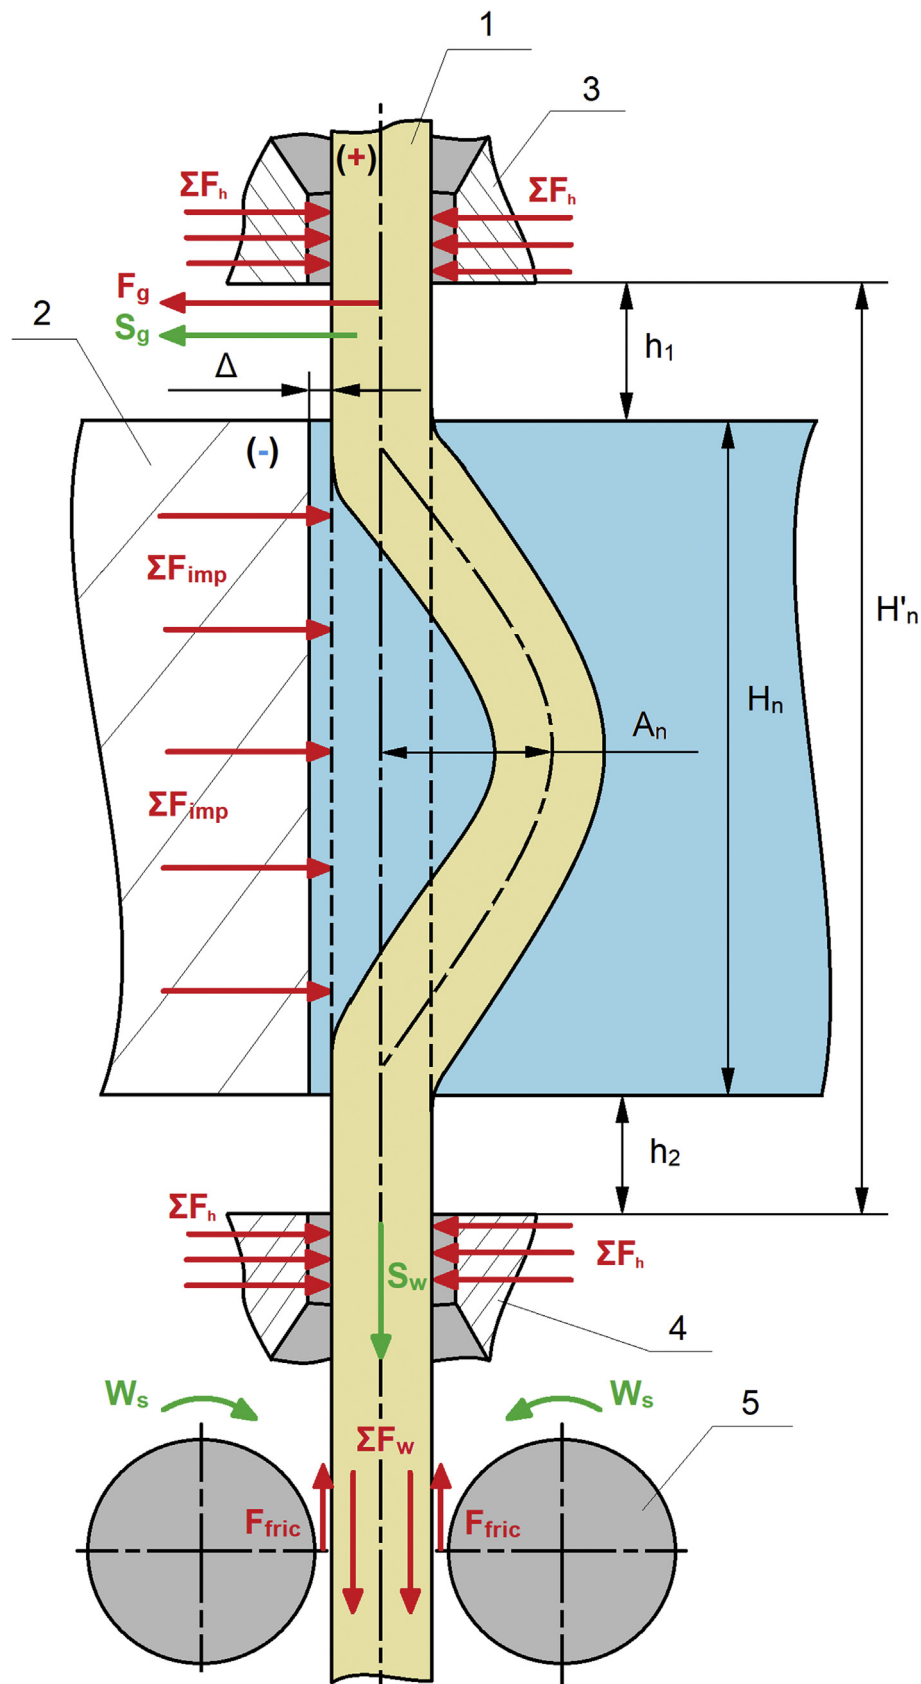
A diagram of applied forces in the working zone during wire electrical discharge machining: (1) is a wire tool, (2) is a workpiece, (3) is a upper nozzle, (4) is a lower nozzle, (5) is rollers [74].
